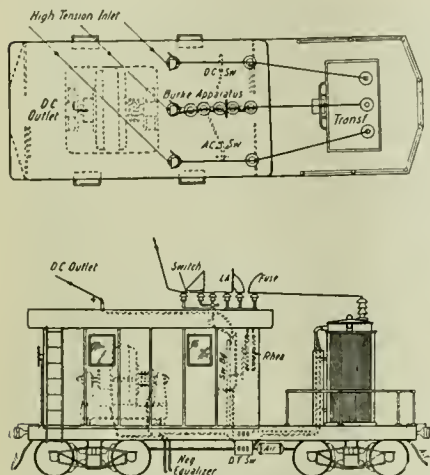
PLAN AND SECTIONAL VIEWS OF PORTABLE SUB-STATION.
